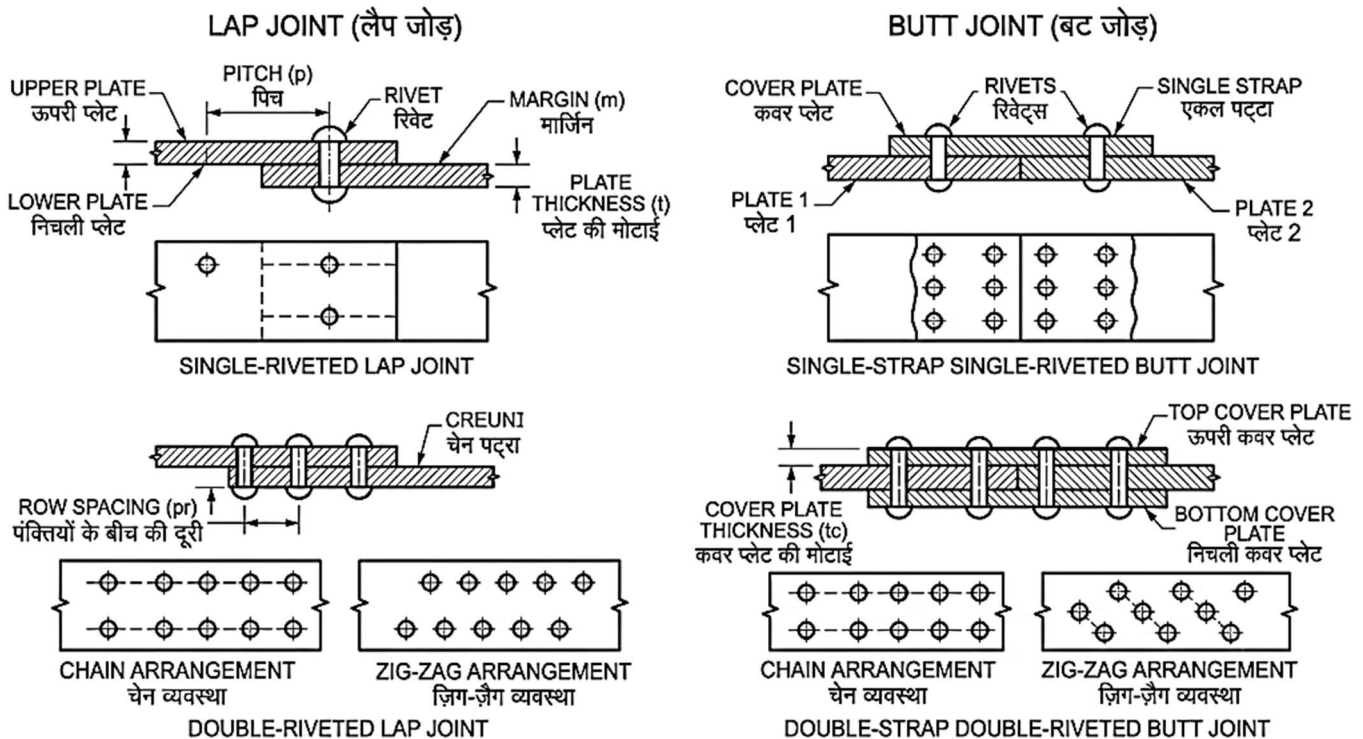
Types of Riveted Lap and Butt Joints with Rivet Arrangements | रिवेटेड लैप एवं बट जोड़ों के प्रकार तथा रिवेट व्यवस्था
